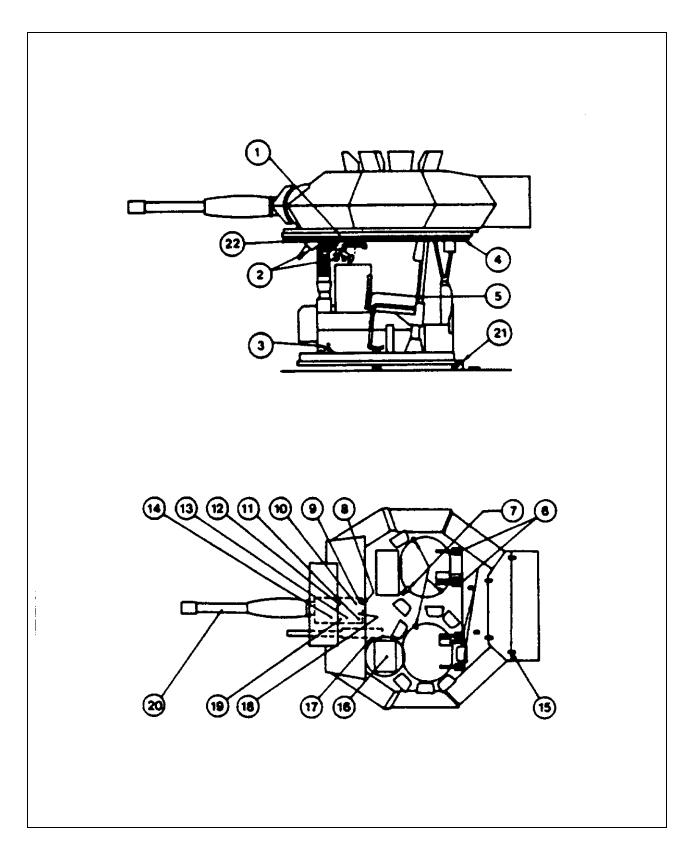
(Sheet 1 of 3) Cougar Turret Lubrication Chart
